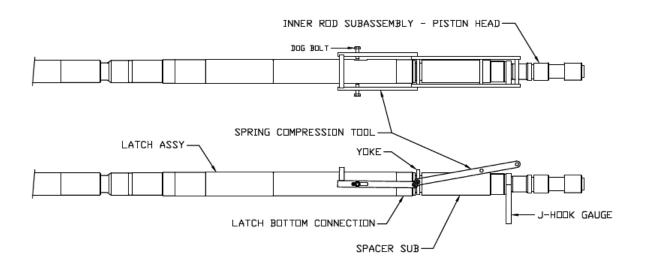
SPRING COMPRESSION TOOL INSTALLATION
